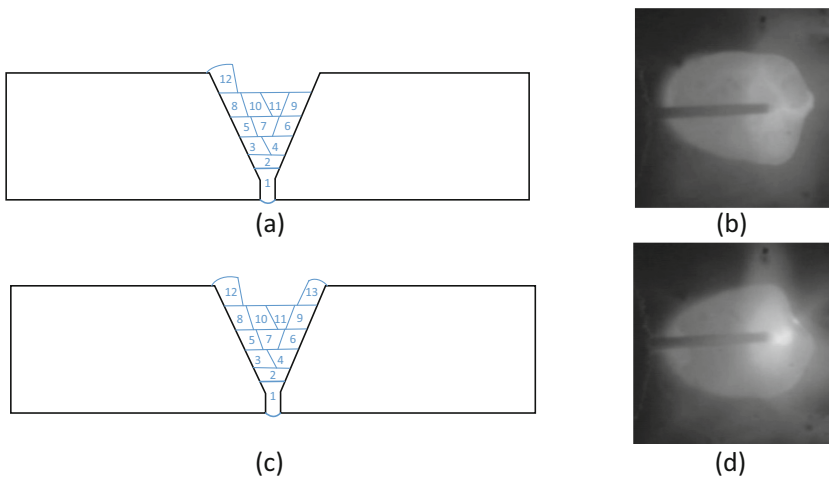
(a) (c) Schematic diagram of weld bead filling. (b) (d) (a) (c) corresponding molten pool image.
